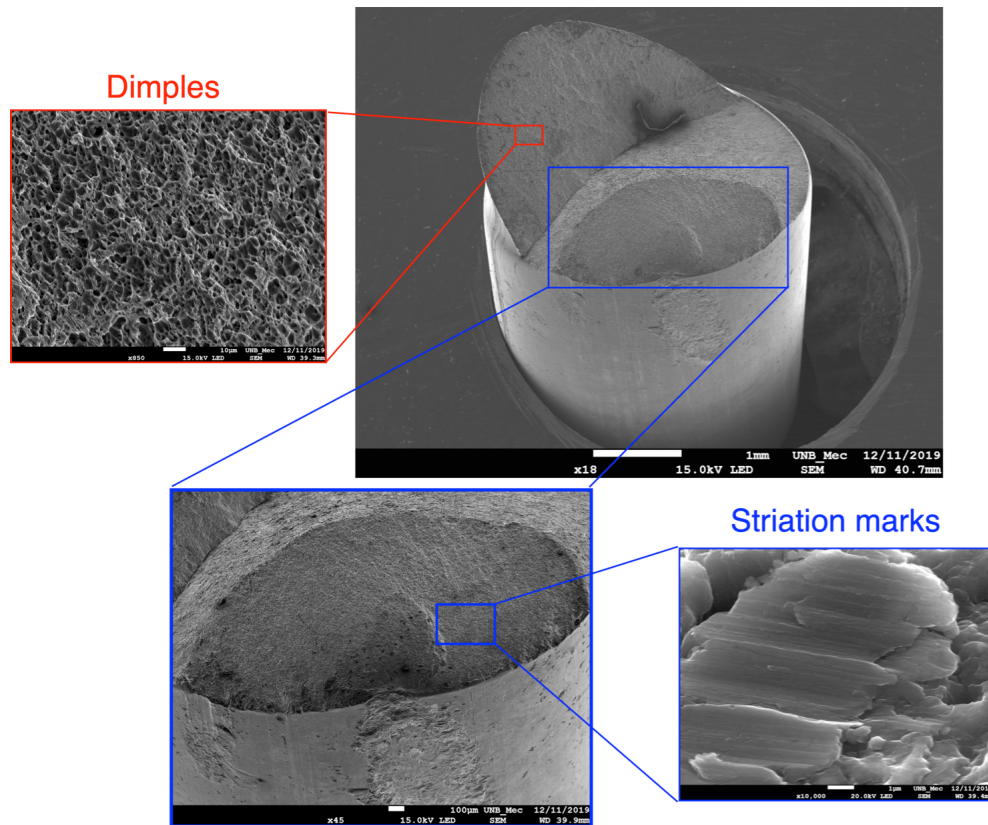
Details of the striation marks and dimples found at the fracture surface of the specimen no. 2.
